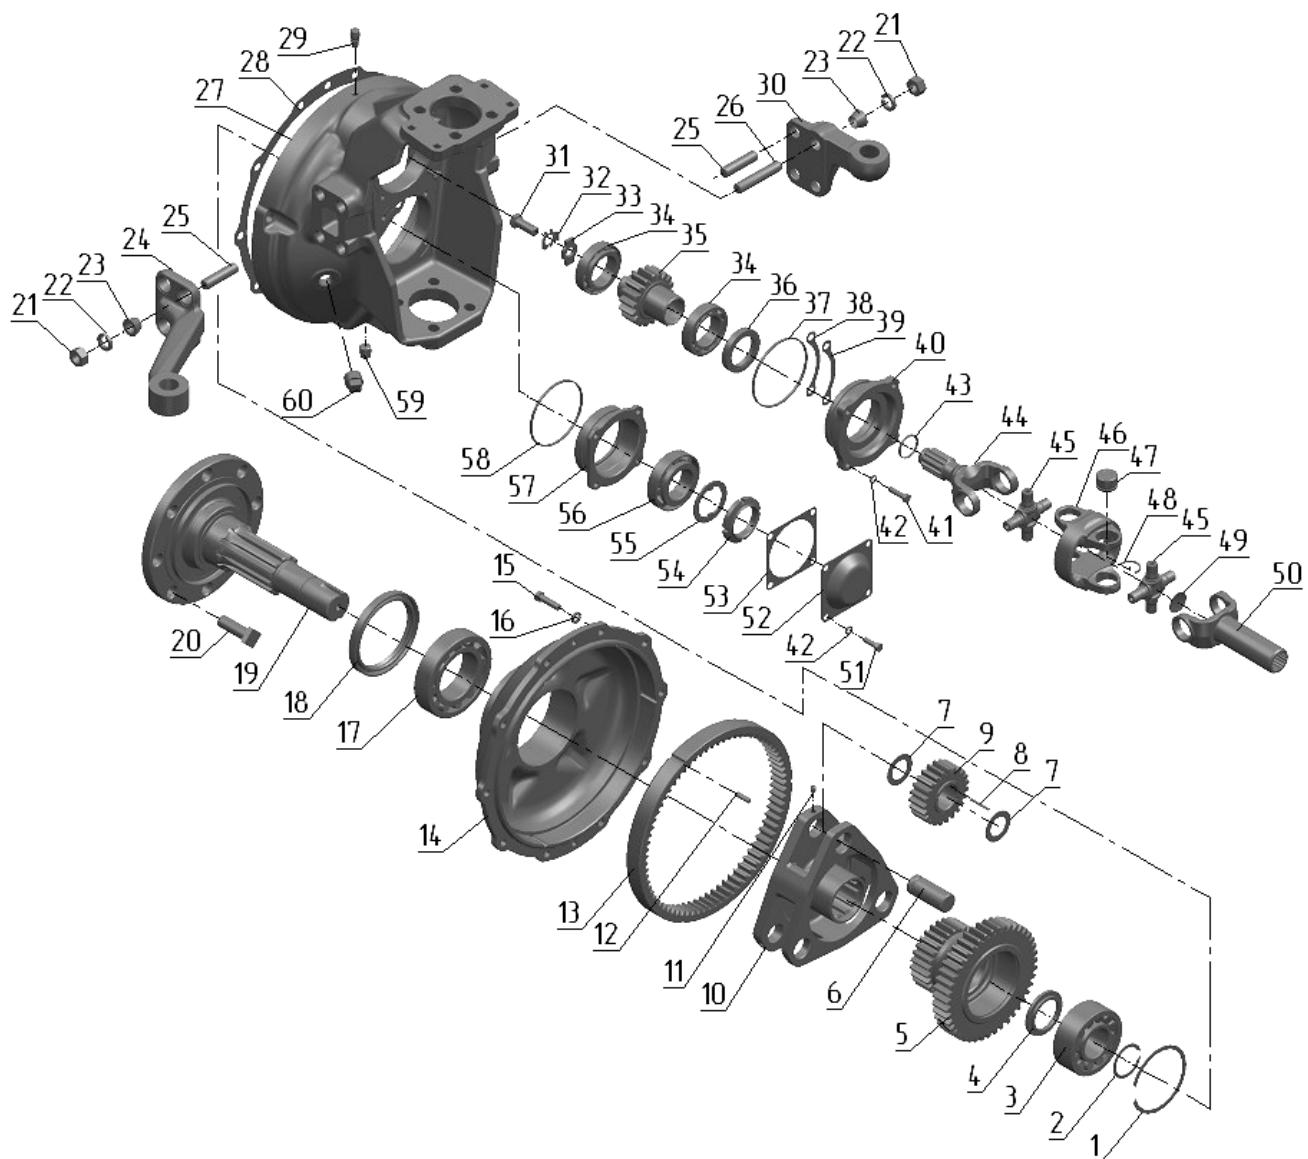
Final drive reduction gear of the front driving axle (for FDA 822-2300020(Fig.23.2))
